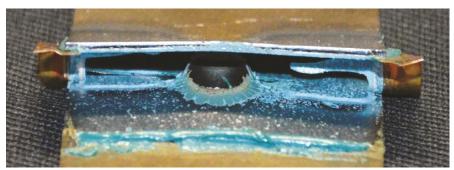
View of samples after shear test. The size of the tab 20 x 45 mm. Thickness of the adhesive layer (distance from copper foil) 0.5 mm. The adhesive joint has been damaged in an adhesive manner. Destruction of the weld joint through full plug mode [14]
